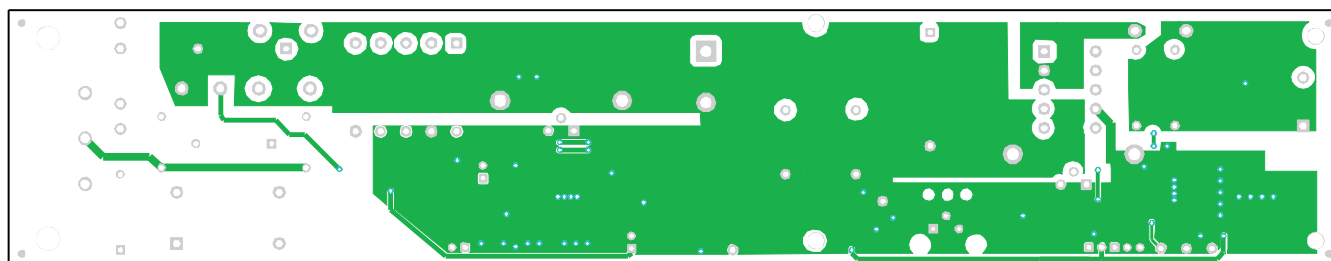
UCC28810EVM-002 Bottom Layer (viewed through top layer)
